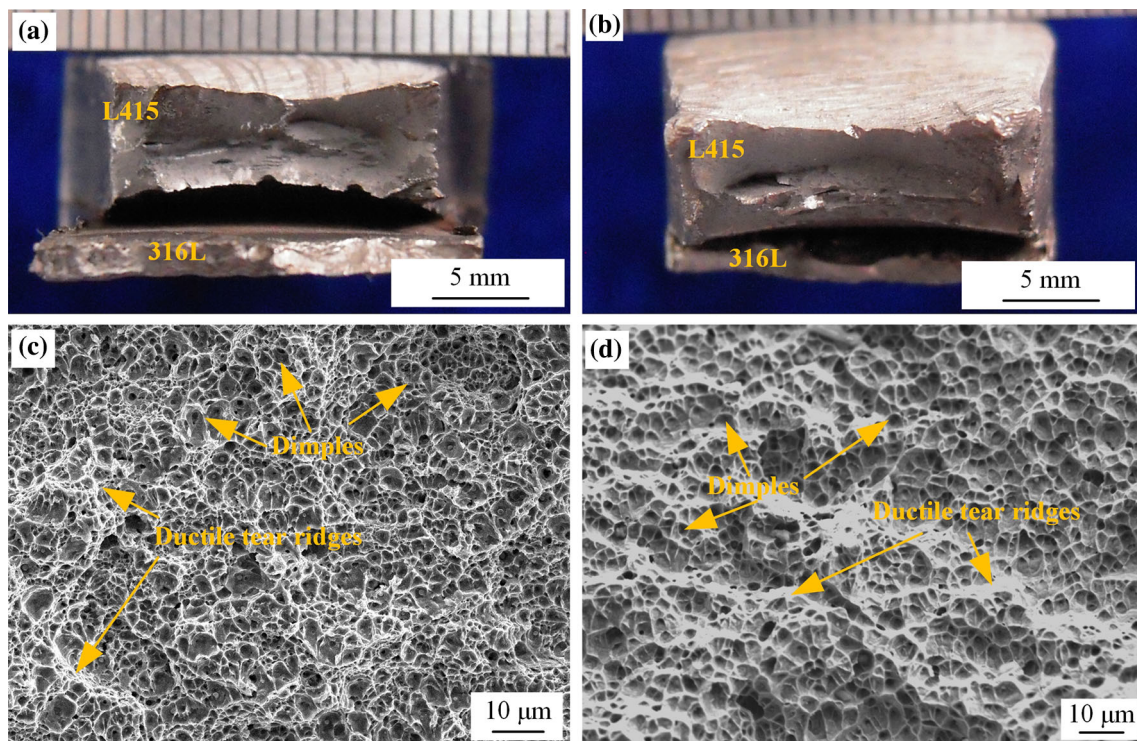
Fractographs of tensile samples a macrofracture of 309MoL; b macrofracture of 309L; c microfracture of 309MoL; d microfracture of 309L
